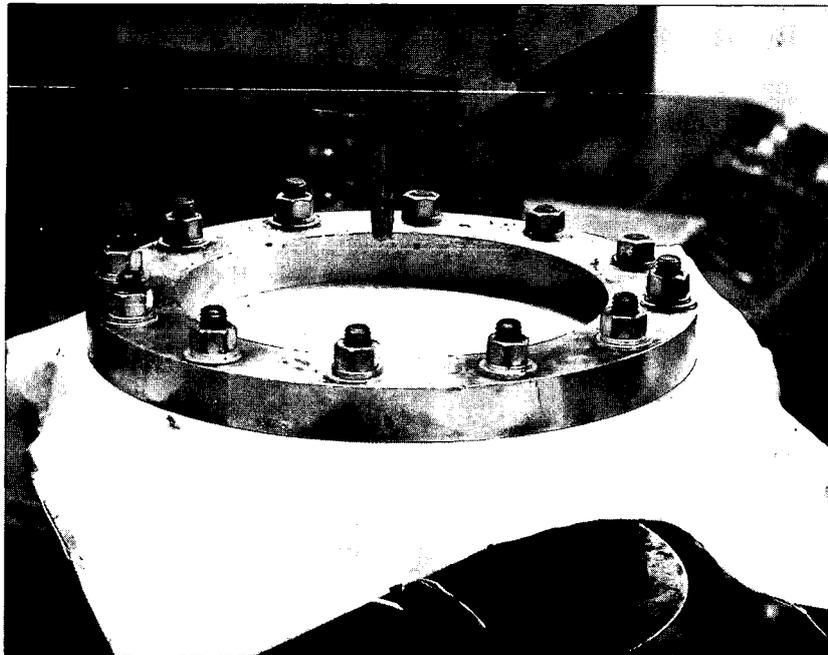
Indenter Fixture Mounted in Instron Testing Machine
